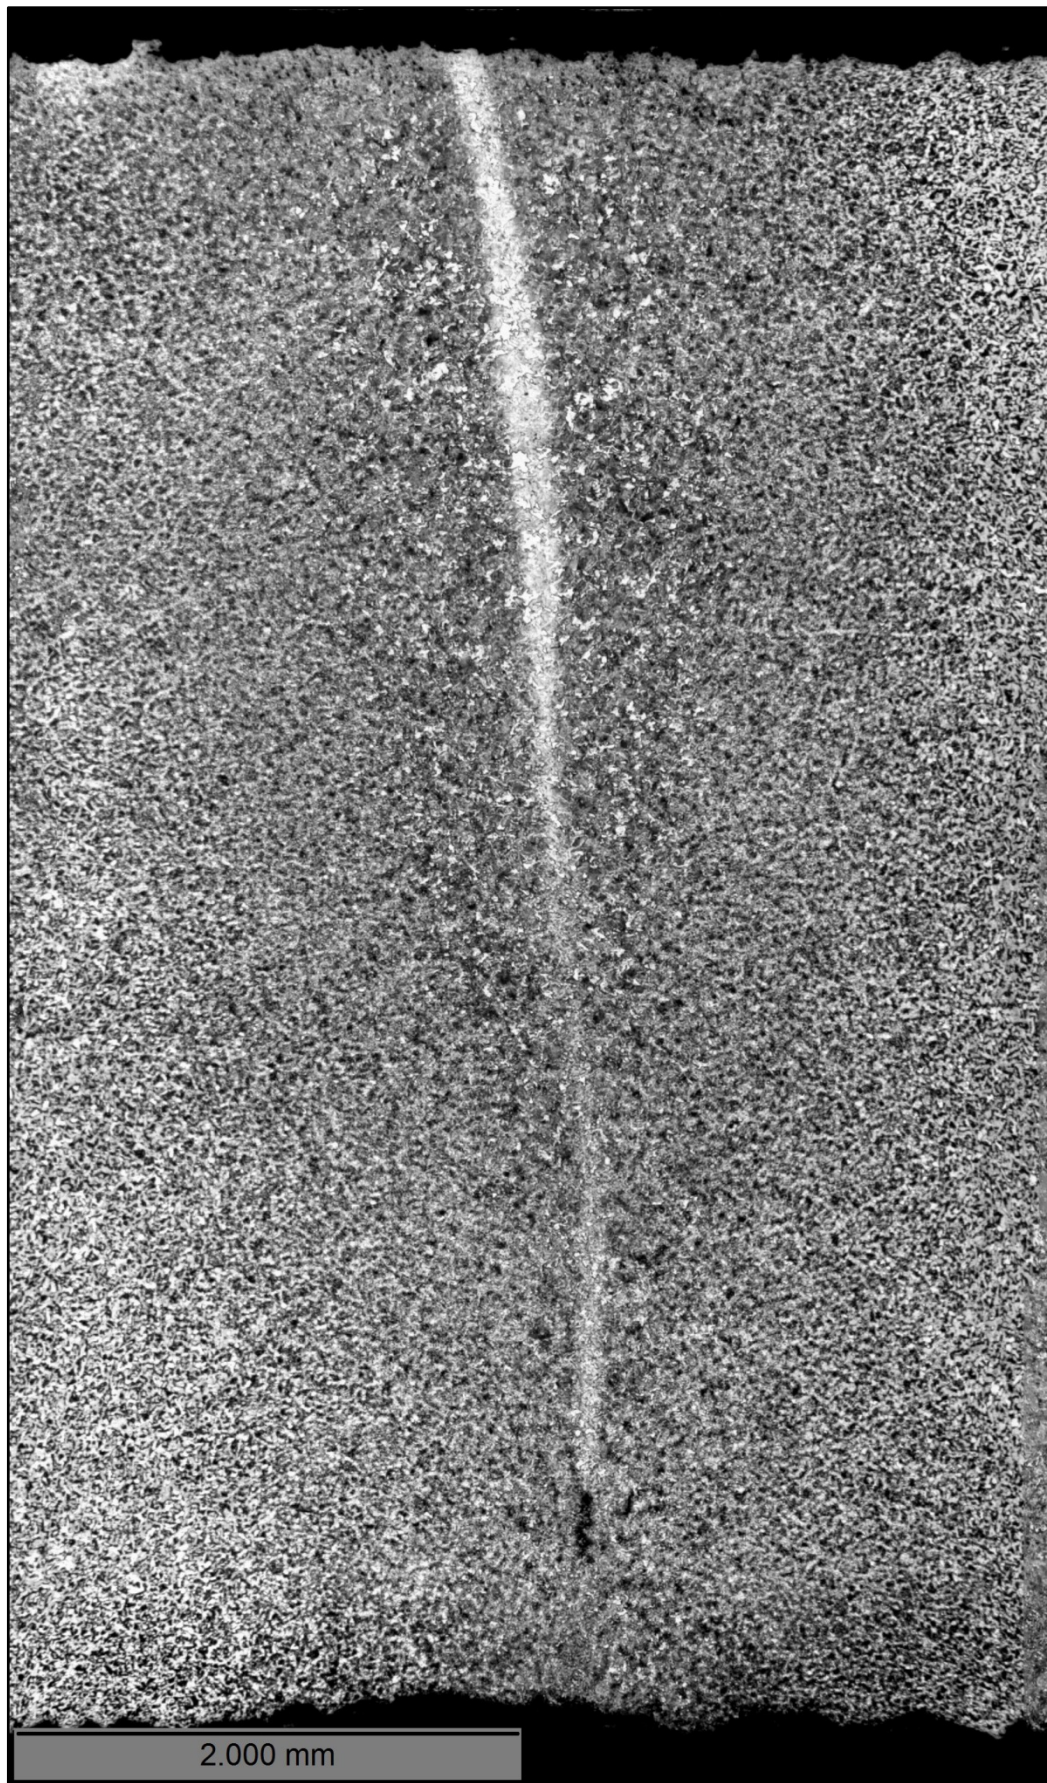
Detail of Sample 16-37 longitudinal seam weld bondline from Figure 5
